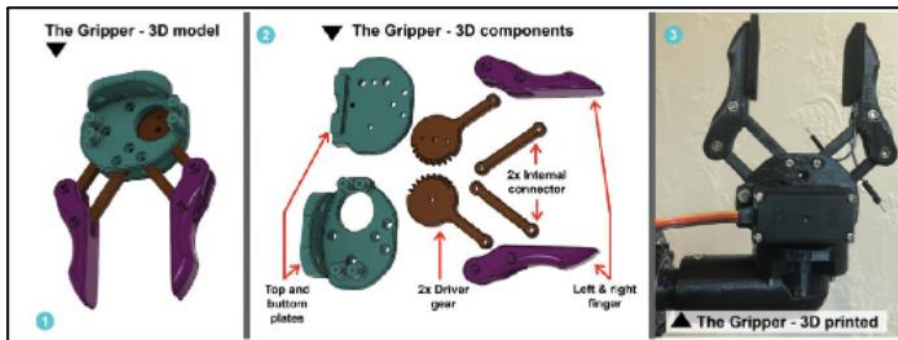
The gripper design, from the 3D assembly (left and central panels) to the 3D printing manufacturing (right panel).
